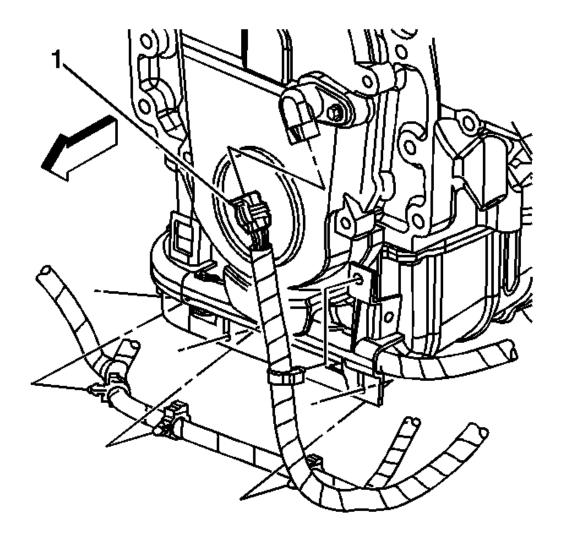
View Of Camshaft Position (CMP) Sensor Electrical Connector Courtesy of GENERAL MOTORS CORP.
